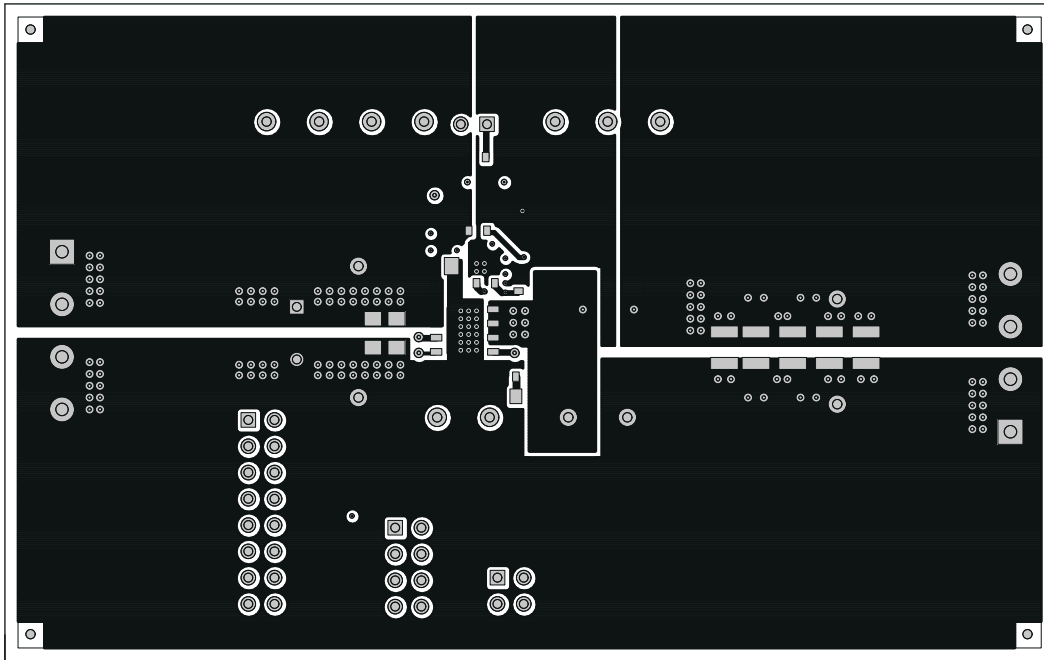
TPS53119EVM-690 Top Copper, Top View
